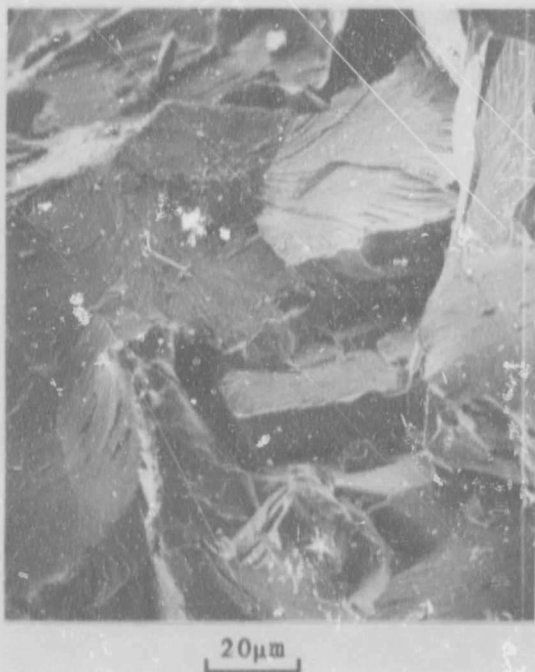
Brittle fracture surface - a mixture of cleavage and intergranular fracture. (Alloy V2/2/2 tested at 0°C.)
